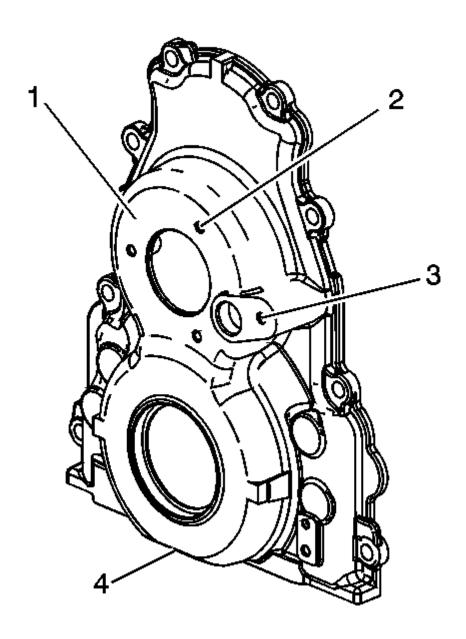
View Of Gasket Sealing Surfaces & Bolt Holes Courtesy of GENERAL MOTORS CORP.
